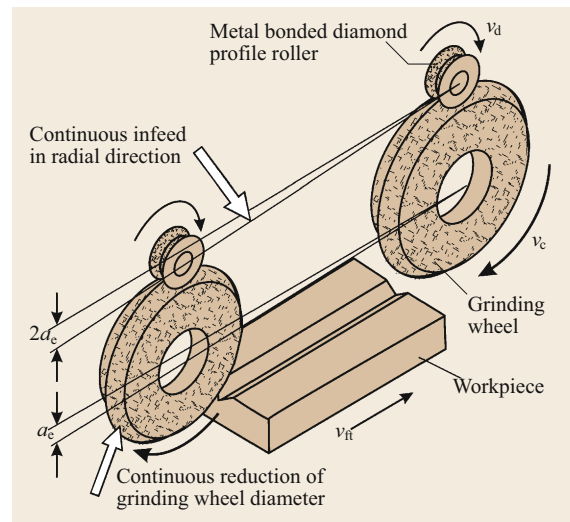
Principle of grinding with continuous dressing (CD grinding)
